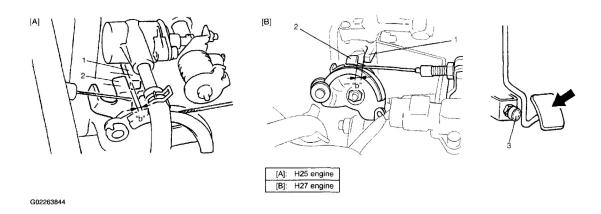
Checking Clearance Between Throttle Lever & Lever Stopper Courtesy of SUZUKI OF AMERICA CORP.
